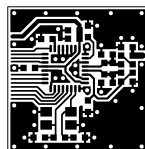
(#) shows a PCB layout example for the application schematic in [Figure 14.](#) and [Figure 17.](#) shows a PCB layout example for the application schematic in [Figure 15.](#) A double sided FR-4 board of 1.6mm thickness is used. This PCB has a ground plane on the bottom layer. Additionally, there are ground areas on the component side of the board to ensure sufficient grounding of critical components. A large number of via holes connect the top layer ground areas to the bottom layer ground plane.
